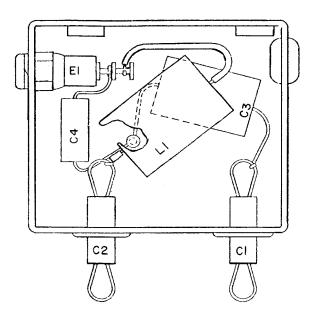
Handset Filter Assembly A2A14, Component Locations
